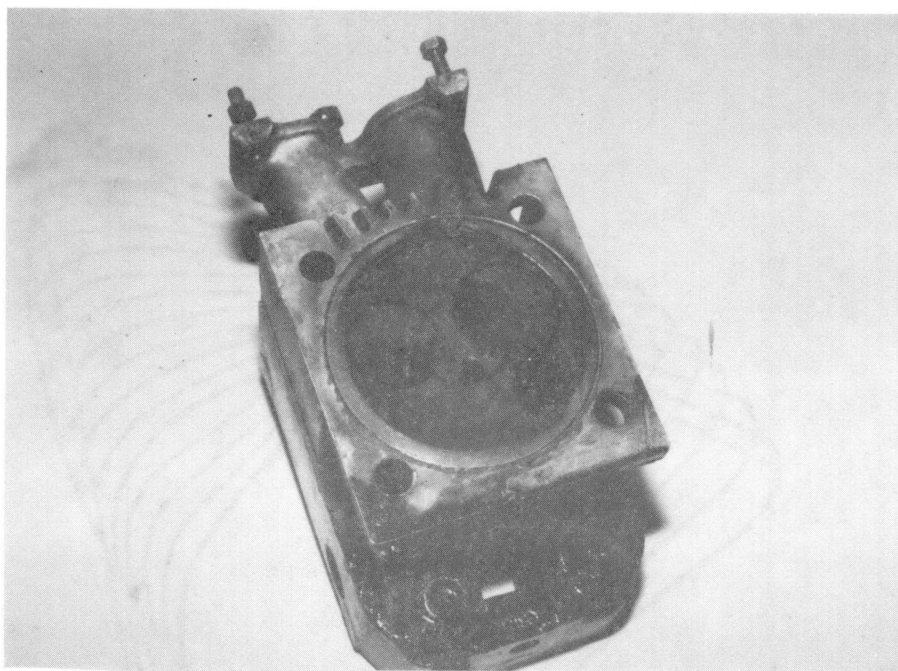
Carbon Deposit on Cylinder Head (Top)
